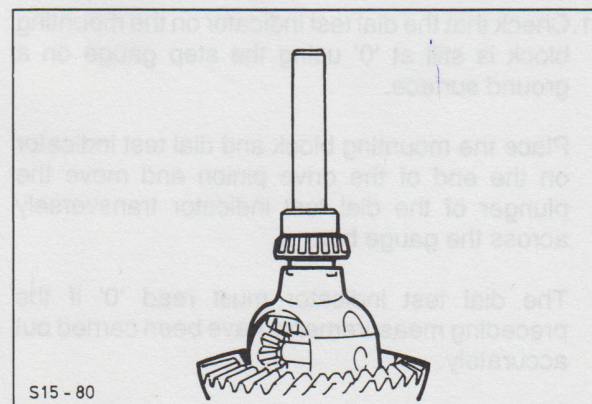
Press taper roller bearing onto differential using Special Tool 15-032.
